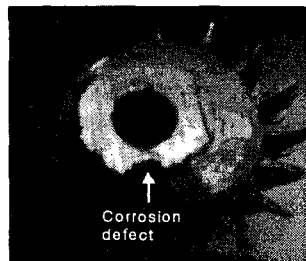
Corrosion appearance in LNG vaporizer tube.
